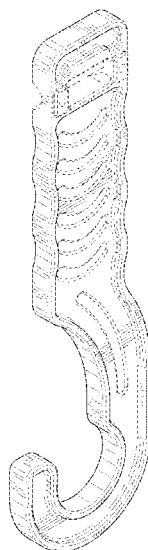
is a left side elevational view of the ironing board hanger shown in FIG. 2;
